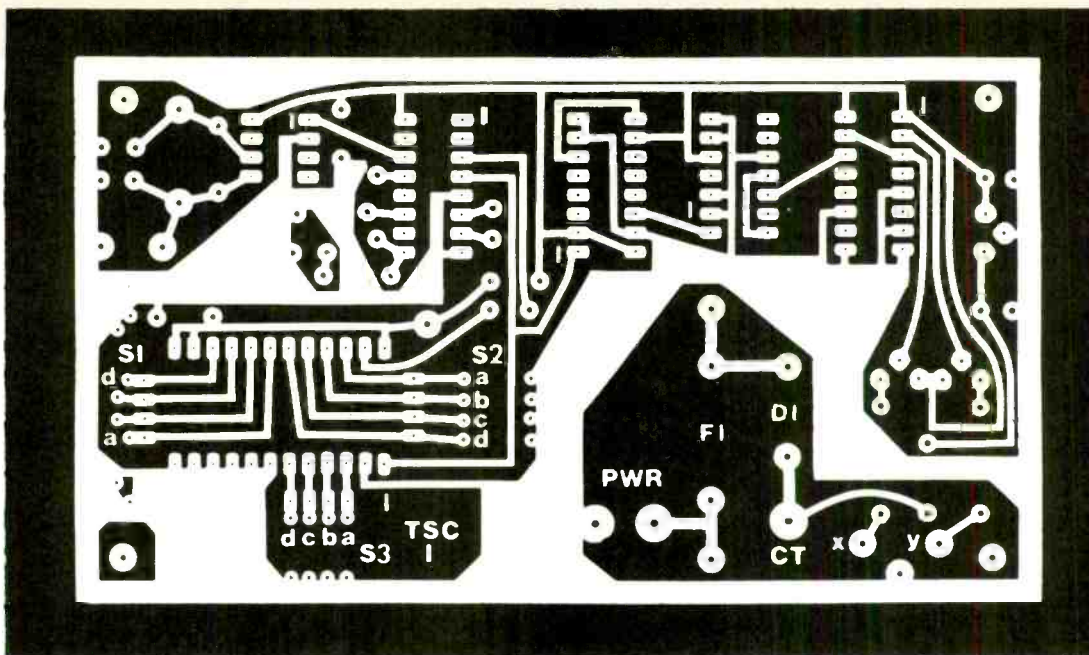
Etching and drilling guide for a printed-circuit board for the project.
